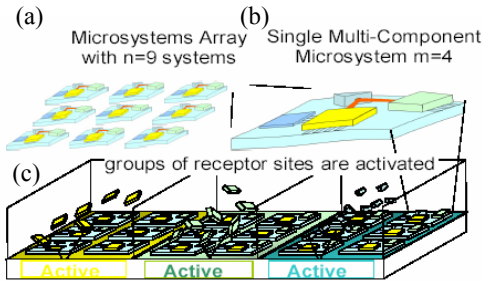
Concept of a "Sequential Self-assembly Manufacturing Line" to assemble multi-component micro-systems.
